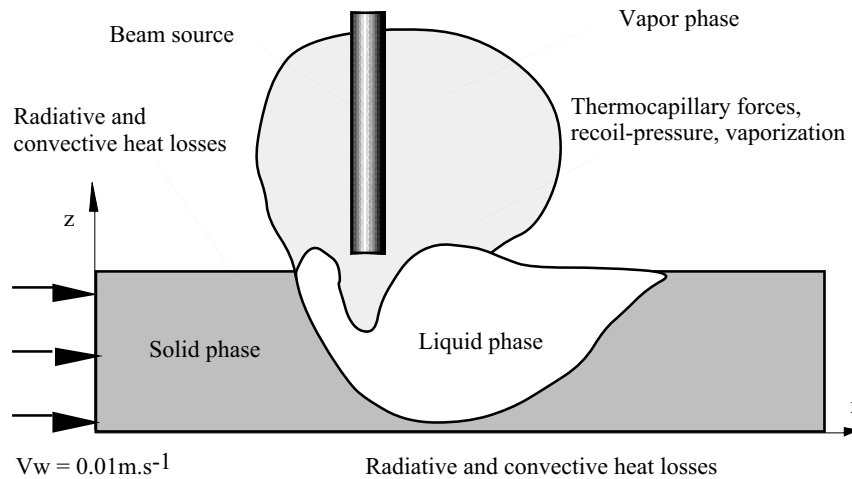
Sketch of the welding configuration in the longitudinal symmetry plane
